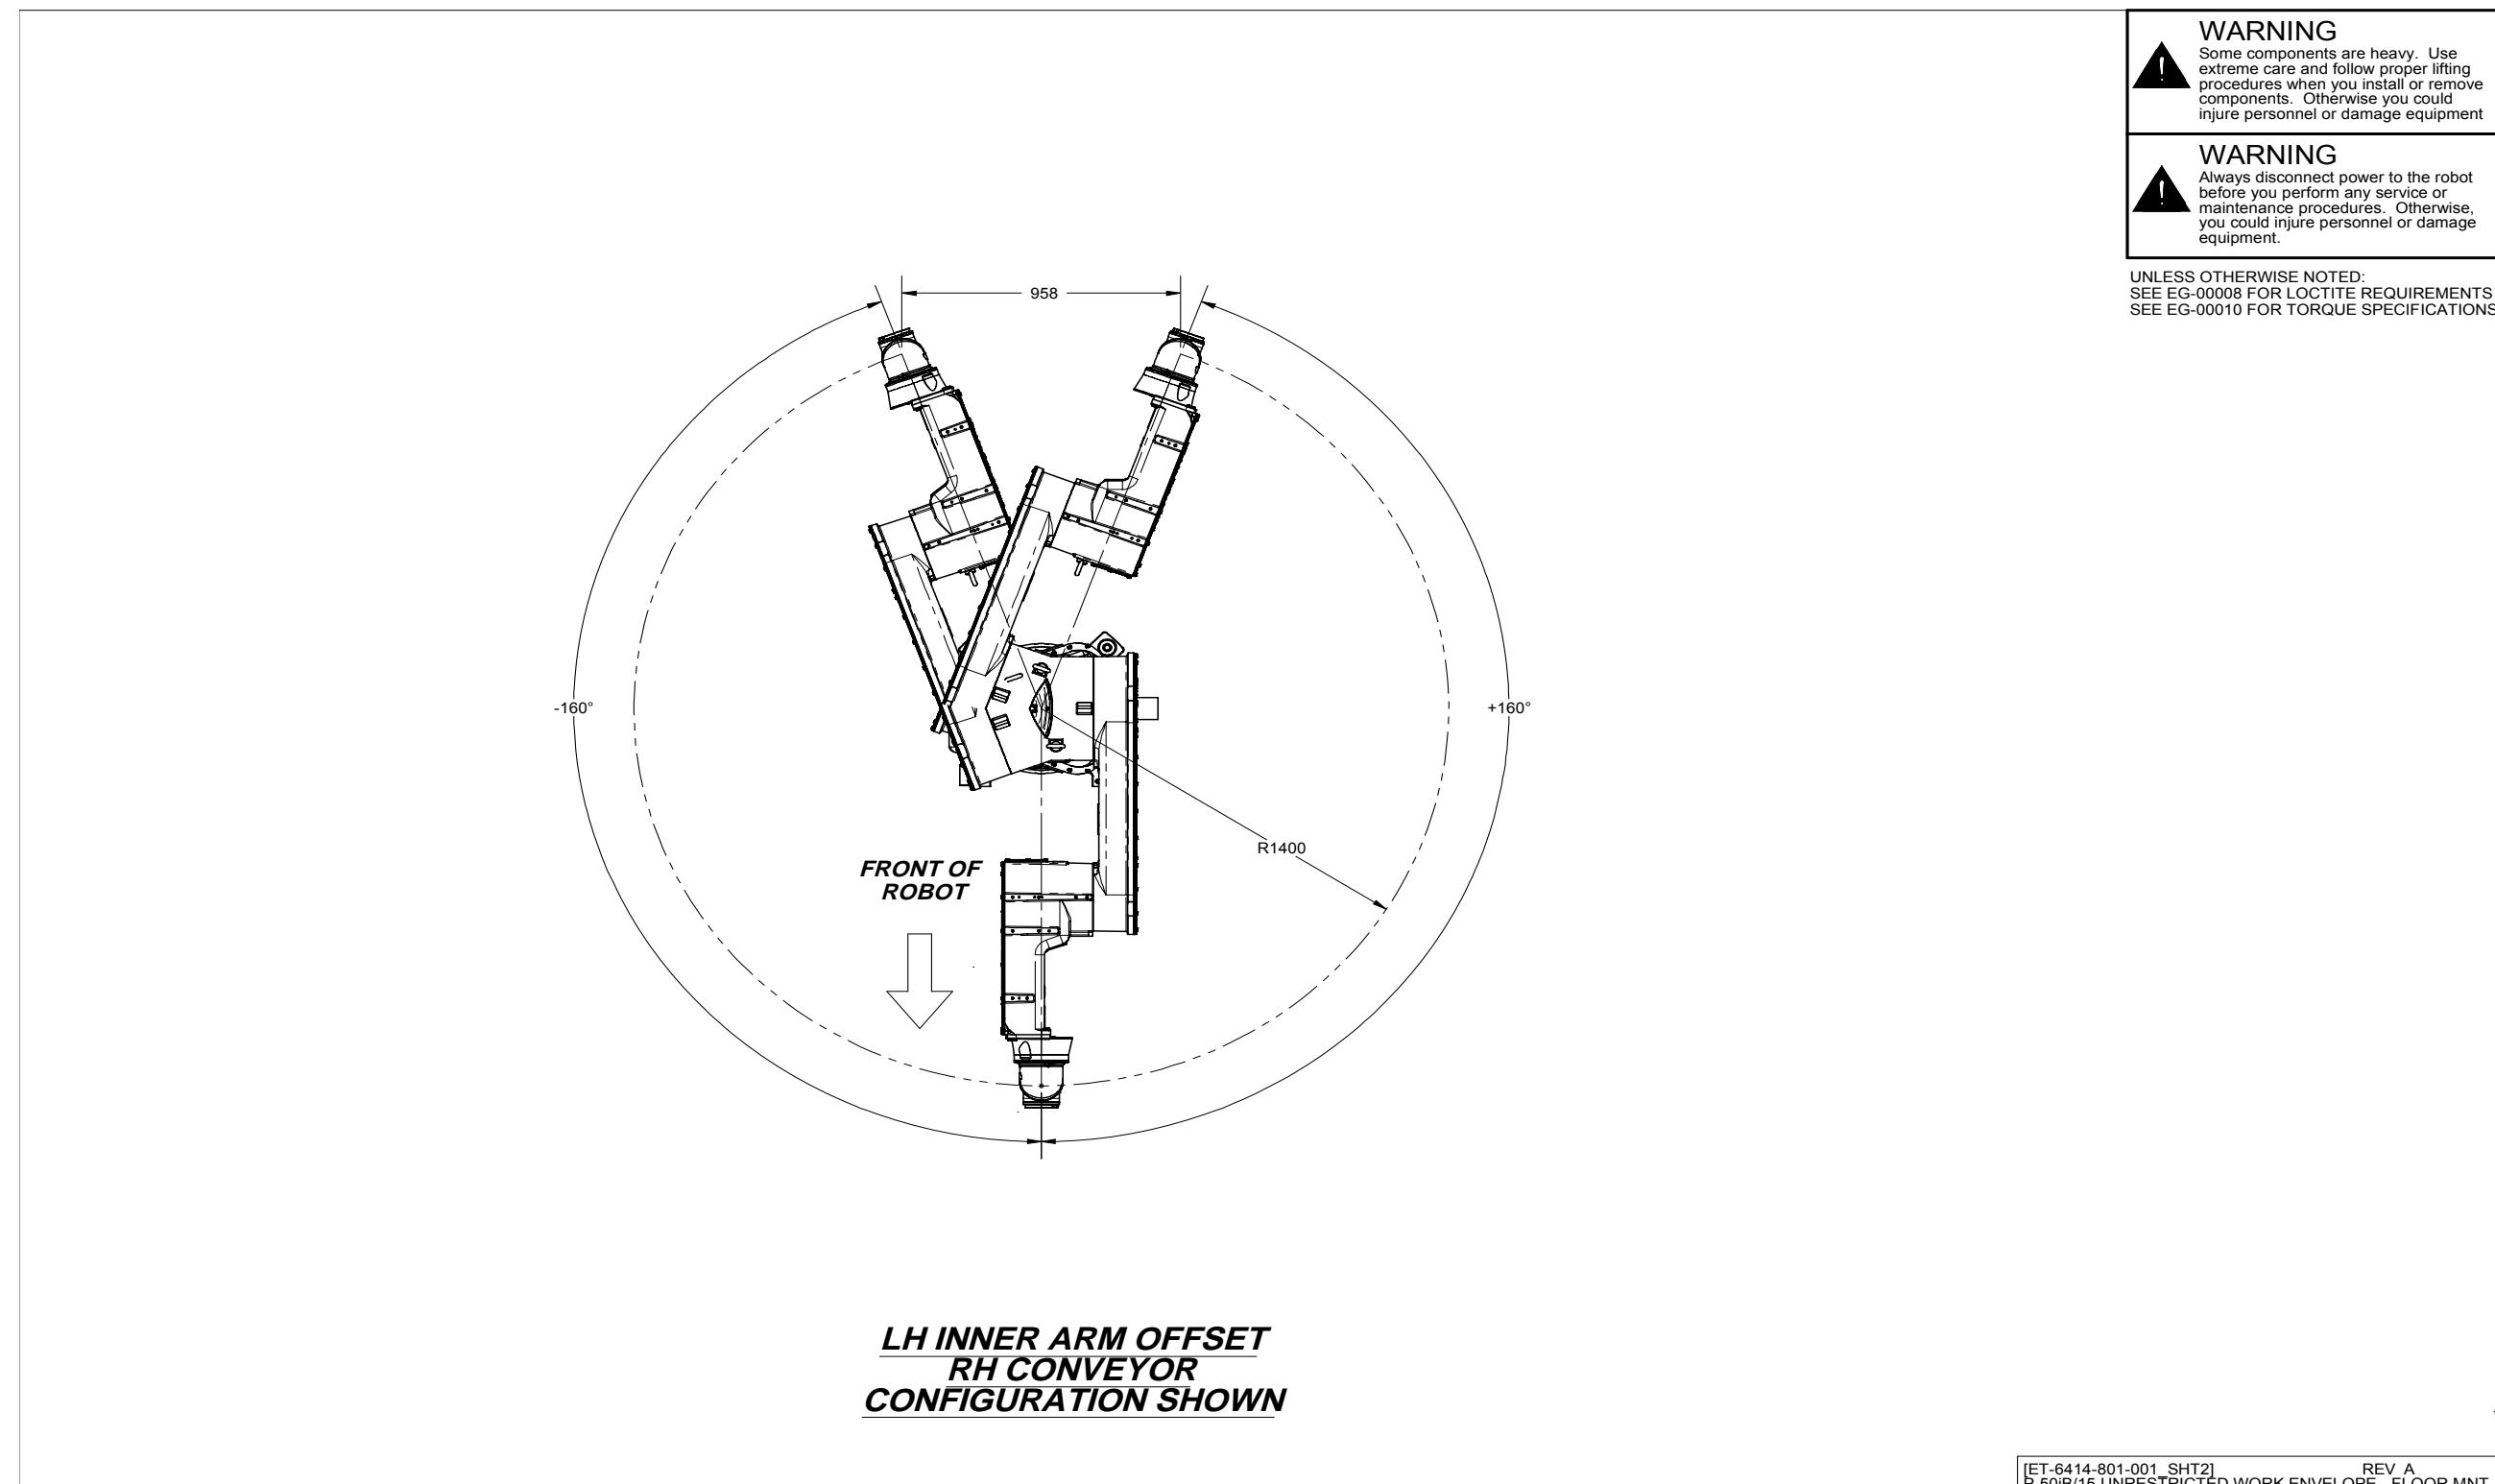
ET-6414-801-001 SHT2, P-50iB/15 UNRESTRICTED WORK ENVELOPE - FLOOR MNT
